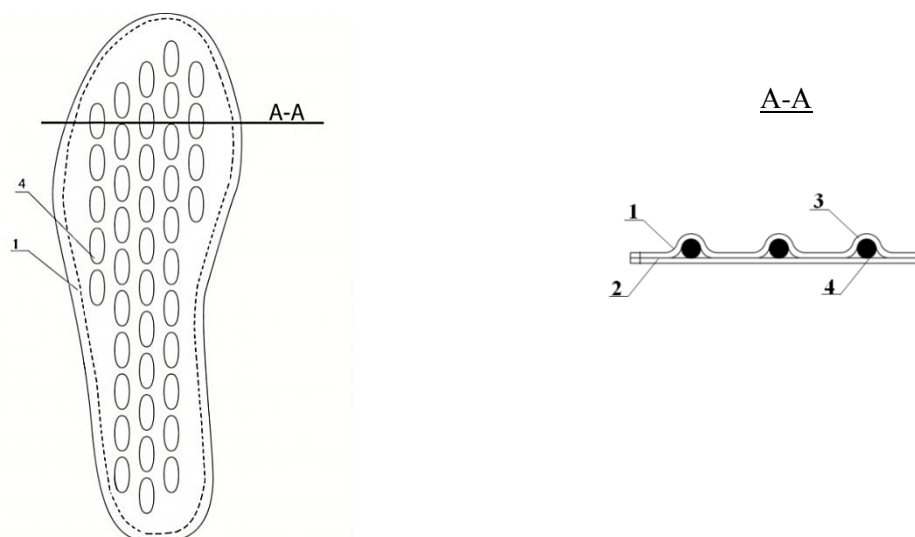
Technical drawing of special purpose insole with preformed upper insole layer
